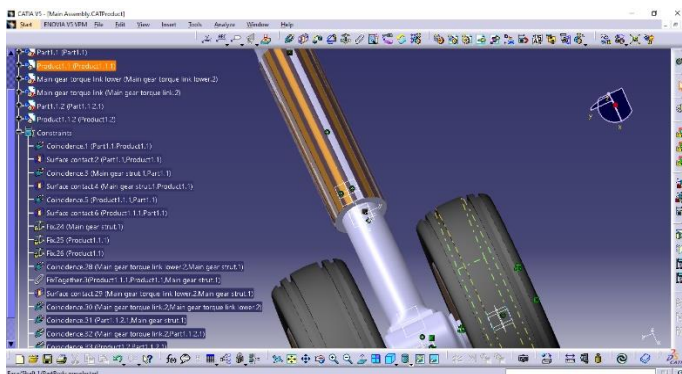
Assembly of DBD Plasma Actuator on landing gear upper strut
